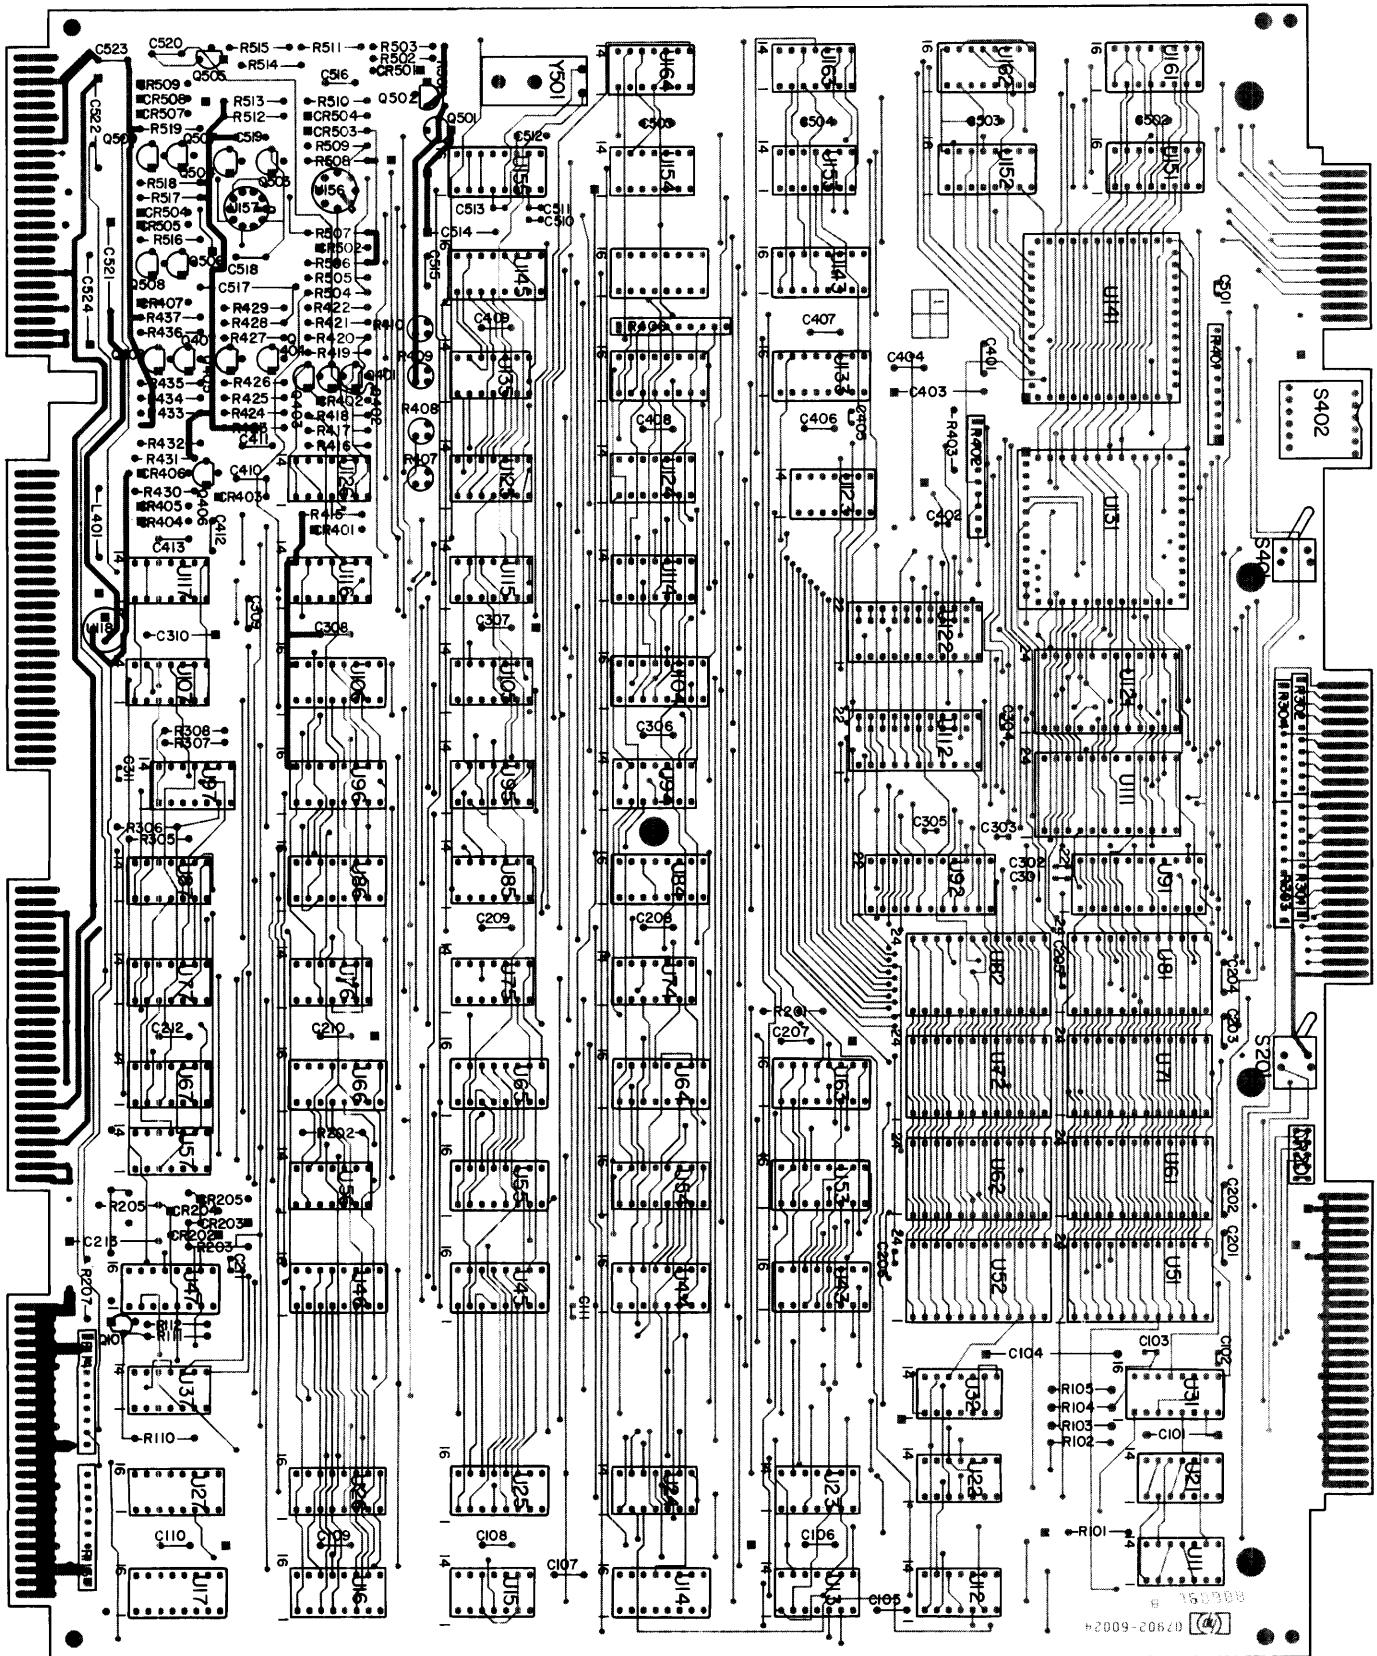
Controller Board A1 (07902-60024) Component Locator
